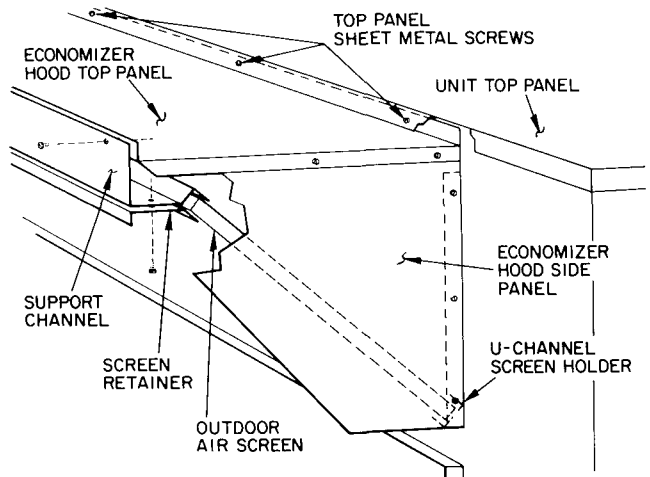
Economizer Outdoor Air Inlet Hood Assembly
